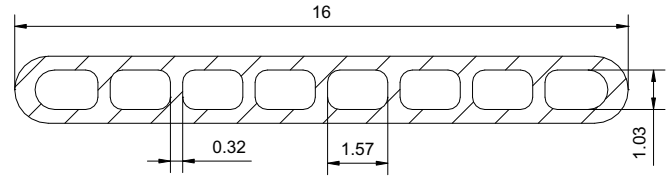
Cross-sectional view of the flat tube used in this study (unit: mm).
